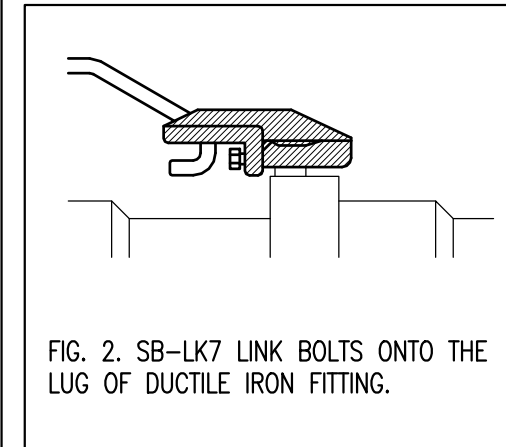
SB-LK7 LINK BOLTS ONTO THE LUG OF DUCTILE IRON FITTING.
